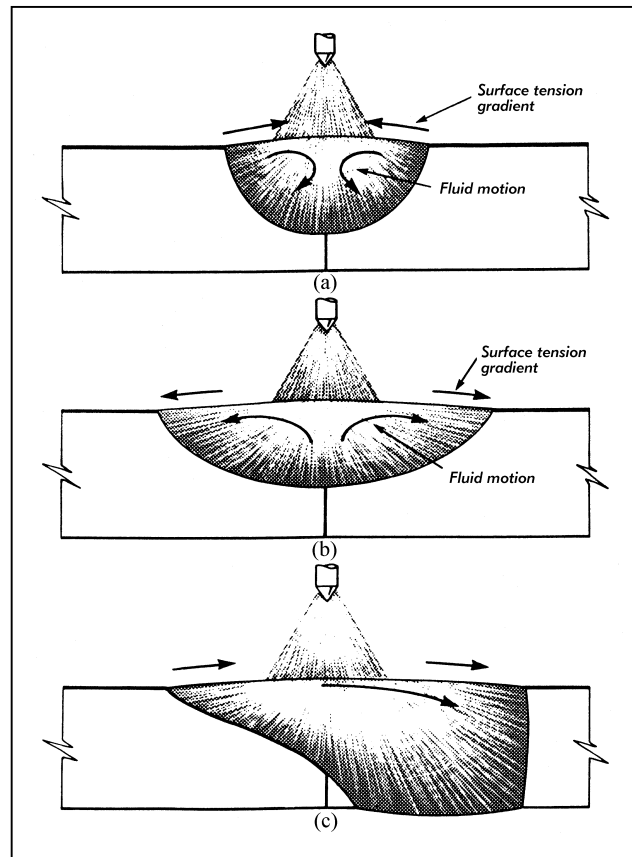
The effects of surface-active elements on weld pool convection and fusion zone geometry in GTAW weldments (after Lancaster, 1986): (a) surface-active elements present; (b) surface-active elements absent; (c) dissimilar materials.
